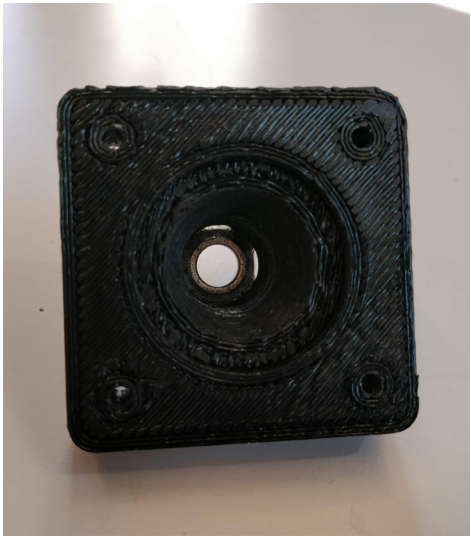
Stepper motor to steel funnel connector parts, 3D printed in black PLA. Source: Author.
